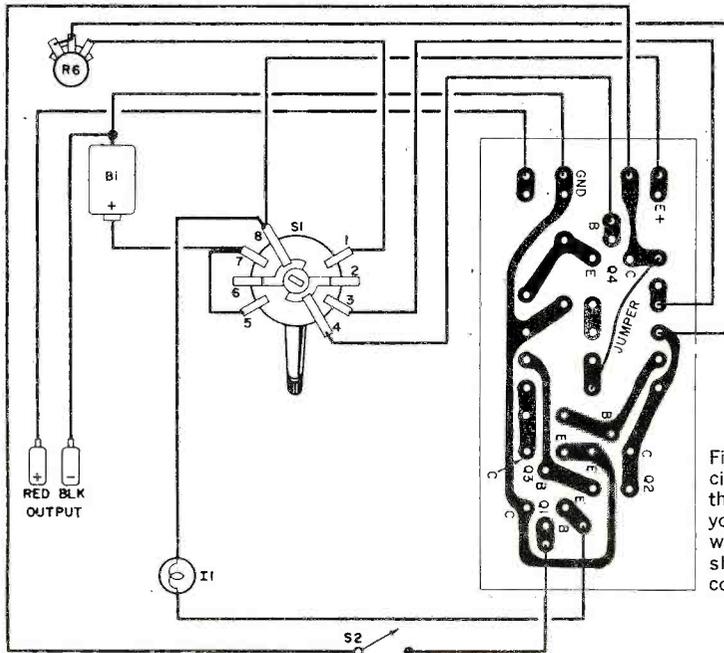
If you use a printed circuit board, these will be the only wiring connections you will have to run. Jumper wire shown on the circuit board should be mounted on the component side of the board.
